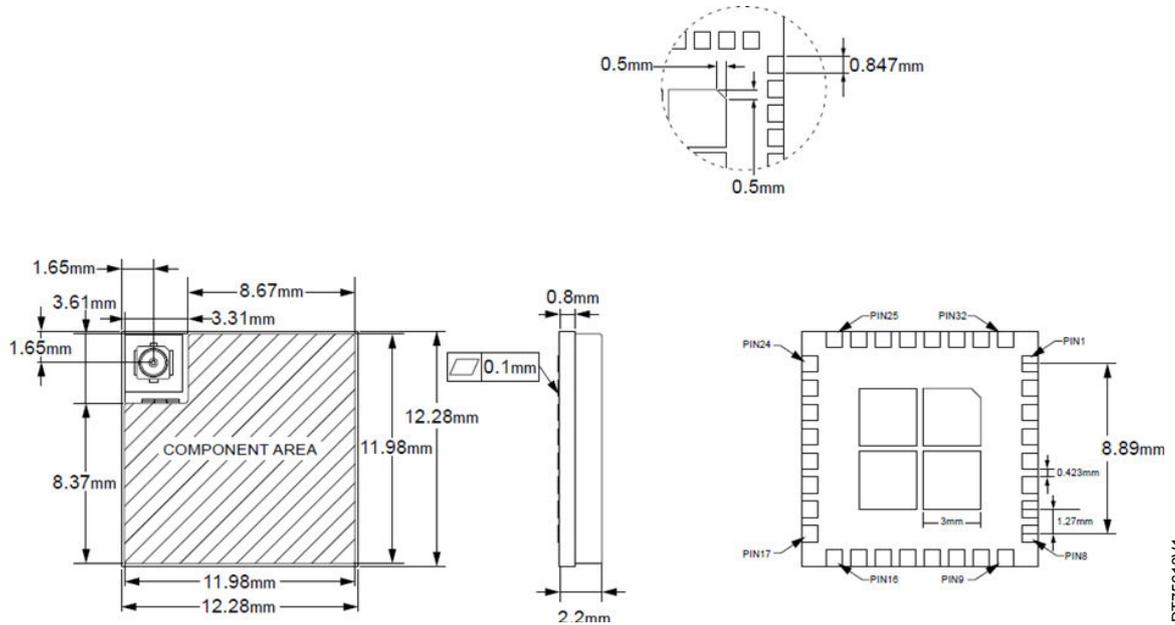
ST67W611M1 LGA module PCB antenna landing pad
